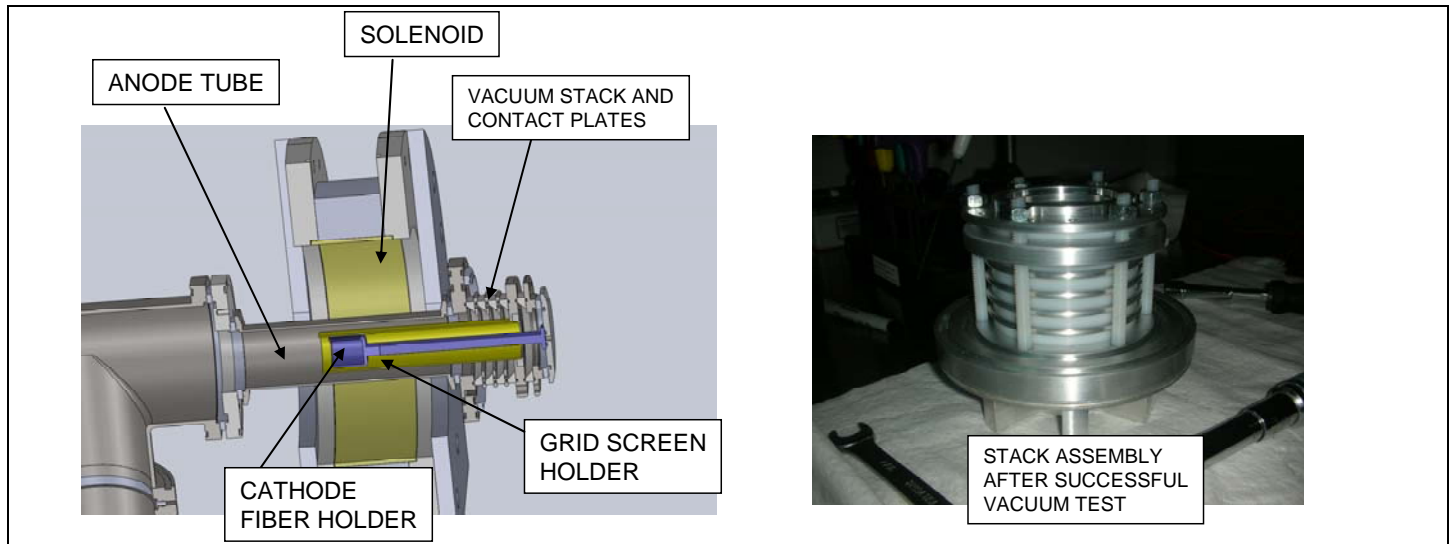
Magnetized coaxial assembly(l) and ring stack (r)
